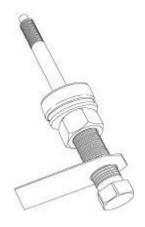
GUIDES, CONNECTING ROD - 8507 Courtesy of CHRYSLER LLC
